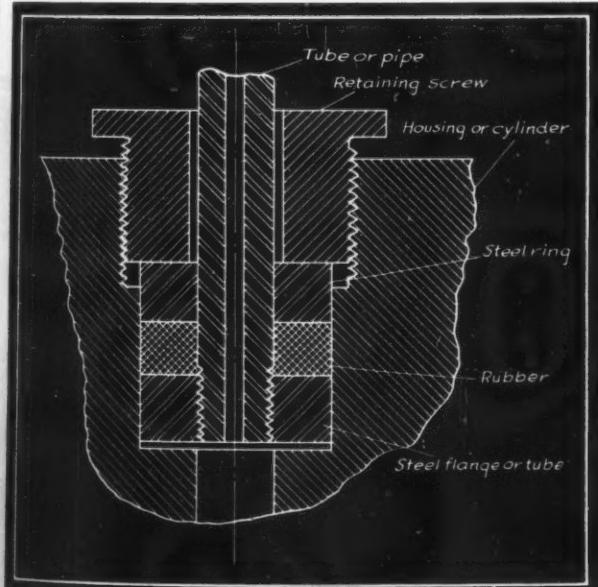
Extreme-pressure packing for pipe connections, cylinder heads and pistons
